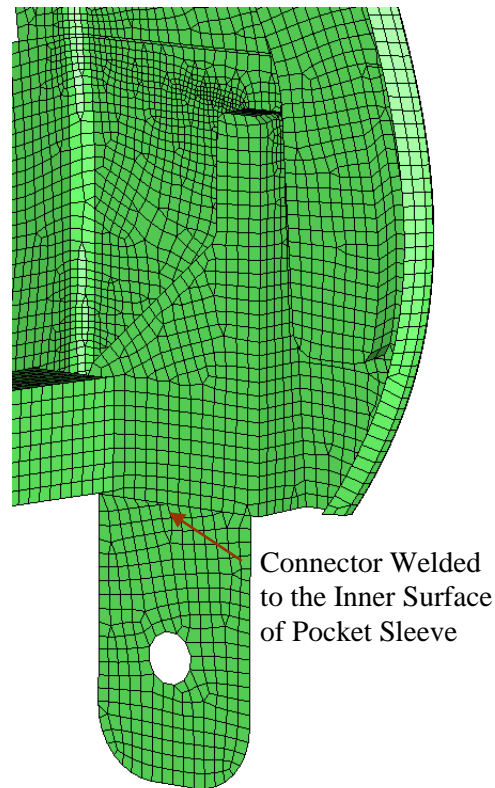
Connector Welded to the Sleeve Pocket
